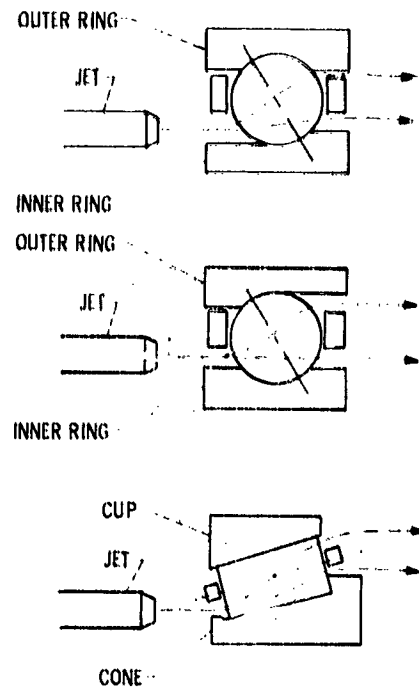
Placement of jets for ball bearings with relieved rings and tapered-roller bearings.
